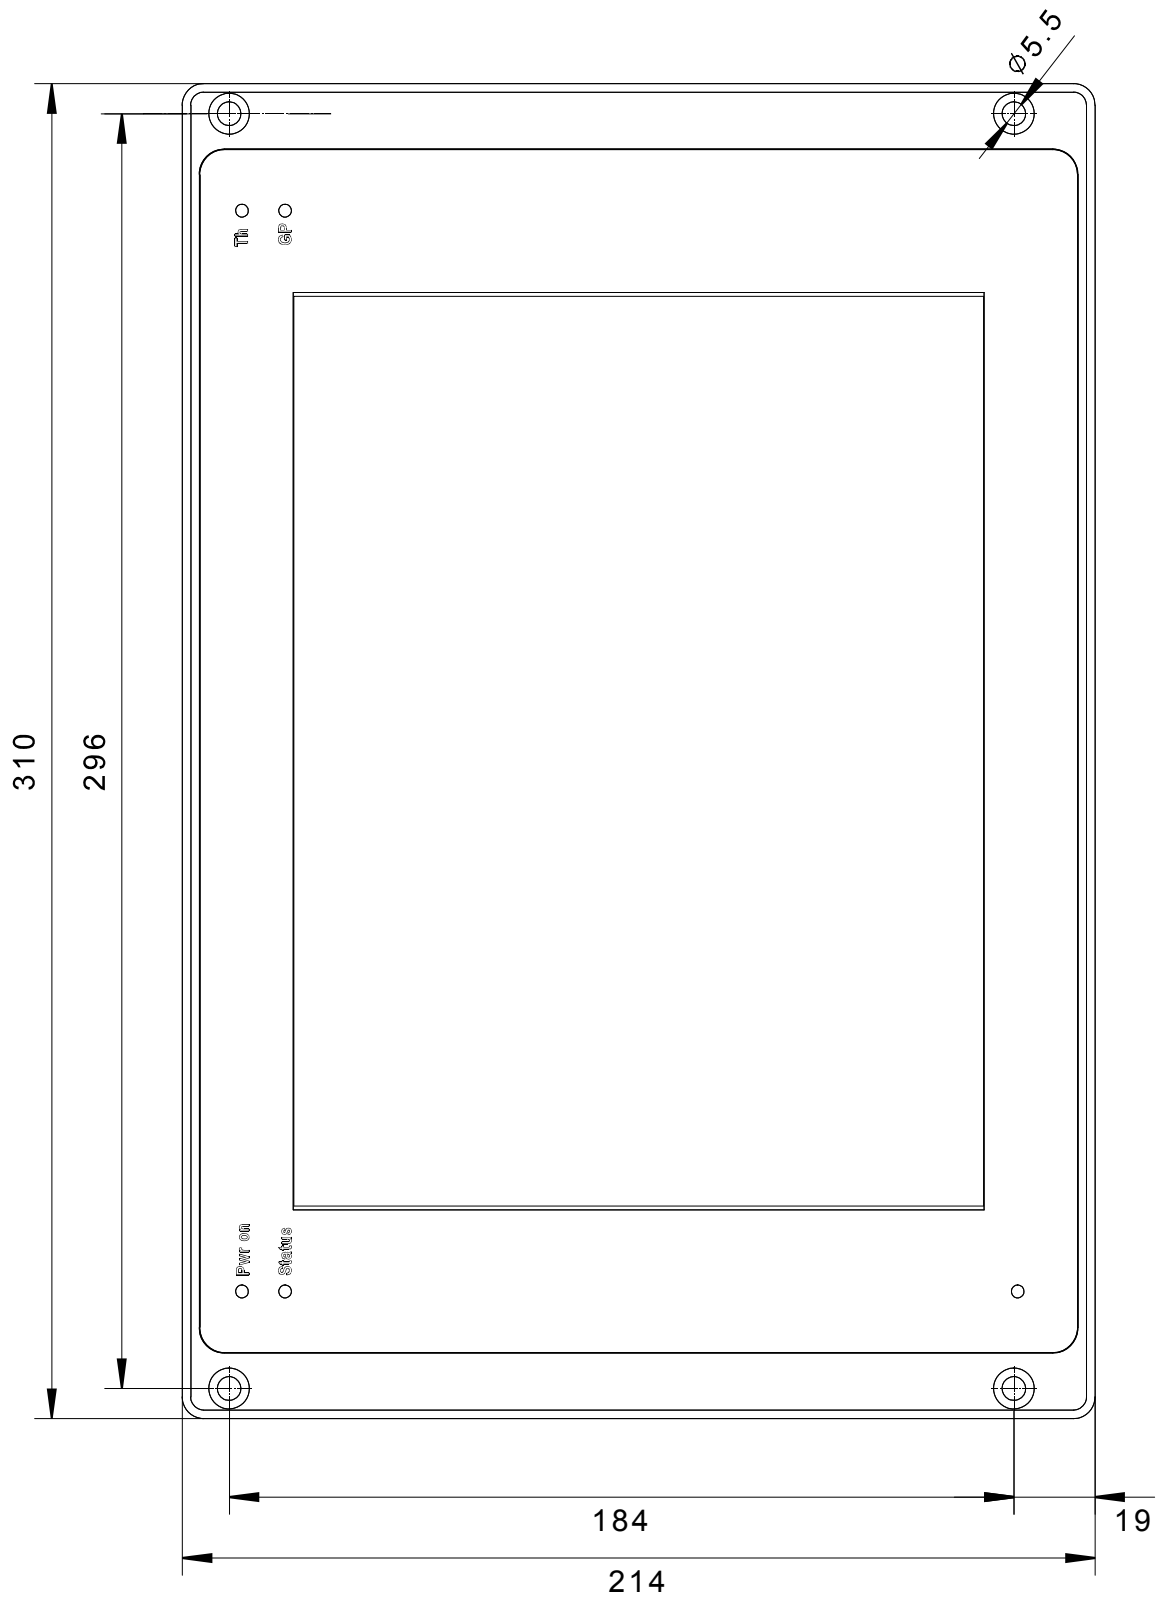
Assembly Drawing of the HMITR-104 Both Versions (Back)
